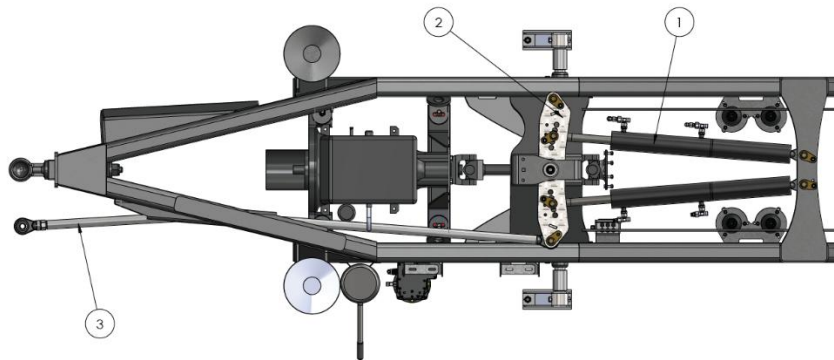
Steering system on a machine with two hydraulically steered axles
